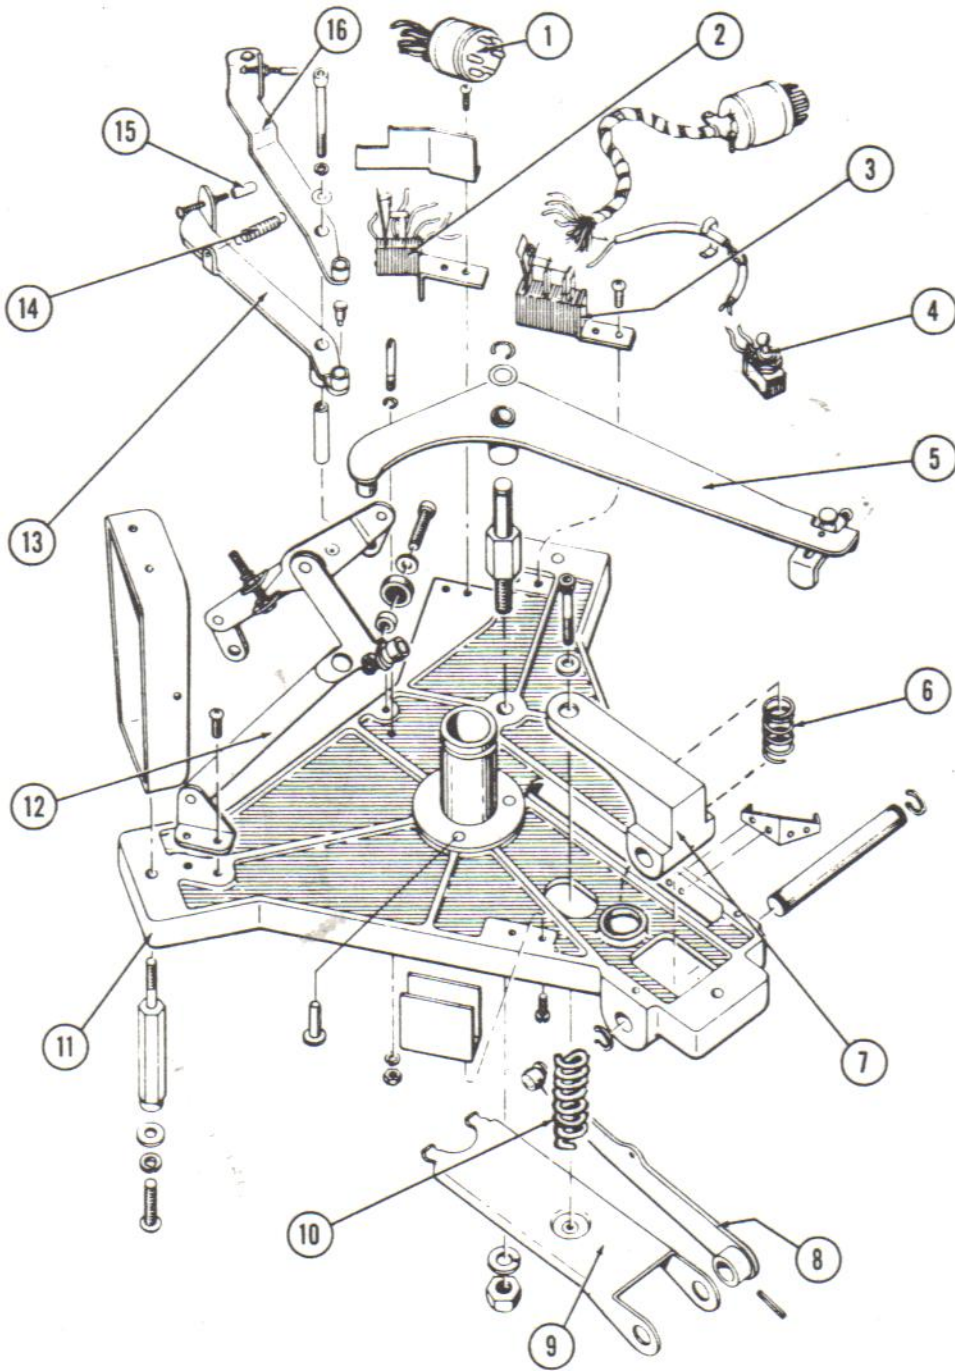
CHASSIS FRAME AND CASTING ASSEMBLY, 2504
